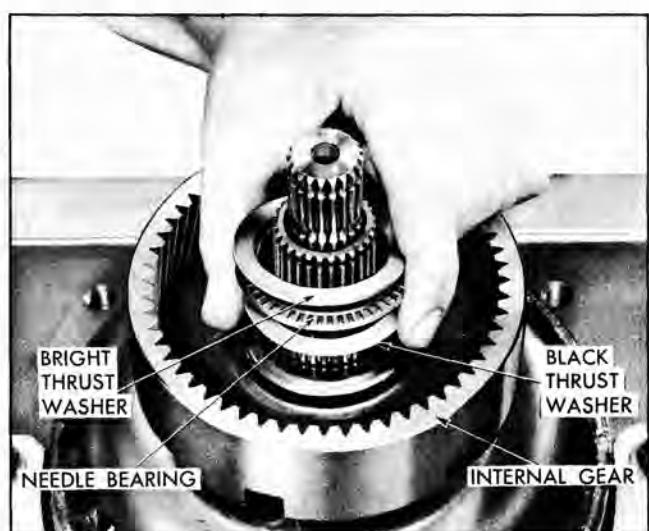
Installing Internal Gear, Needle Bearing and Washers for Front Unit End Clearance Check
